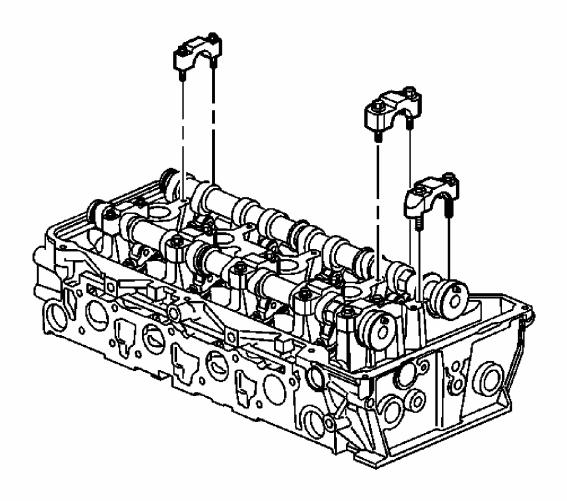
View of Right Intake Camshaft Bearing Caps Courtesy of GENERAL MOTORS CORP.
